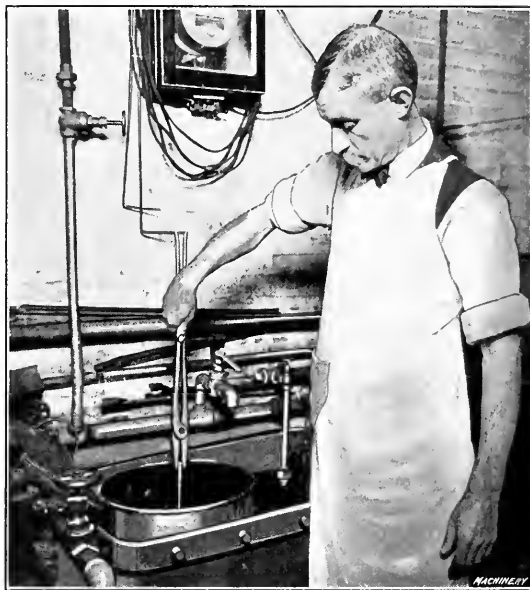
Hardening a Redrawing Punch—Note Method of Dipping
